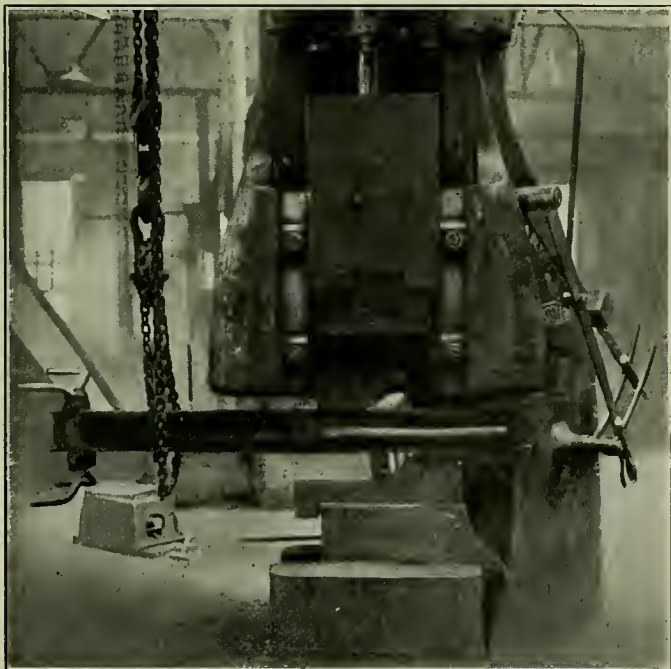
View Showing Formers in Place and End Sill Before Being Offset
